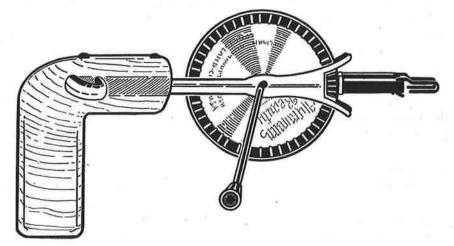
COMMERCIAL WINDER WITH HOMEMADE PISTOL GRIP
